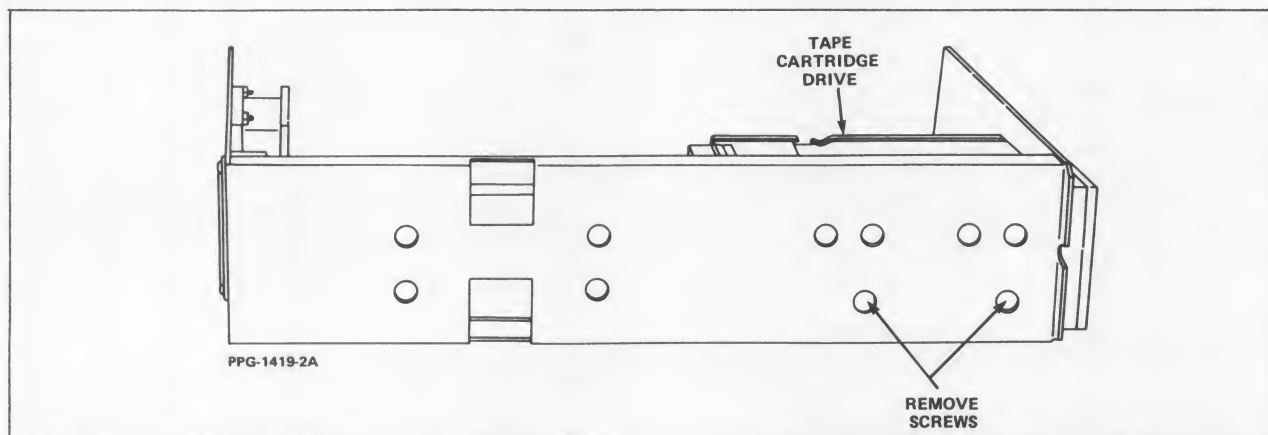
Tape Cartridge Drive Attached to Tape Cartridge Drive Enclosure
